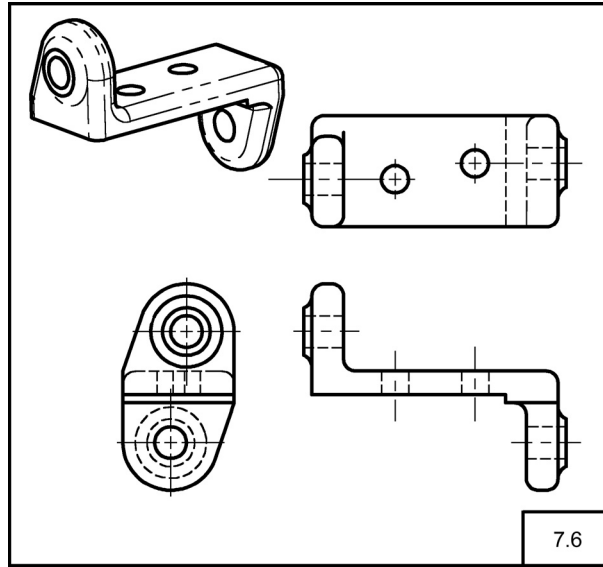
Drawing With Three Orthographic Views of a Stamping
